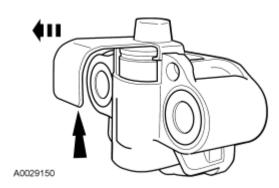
View Of Retaining Clip And Timing Chain Tensioner Courtesy of FORD MOTOR CO.
